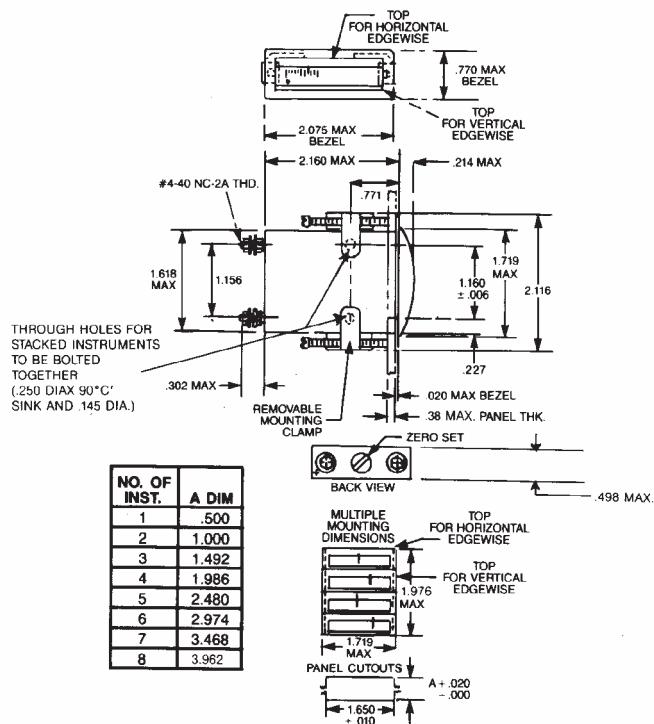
Outline Dimensions for 1½-inch Type 286 Meter
